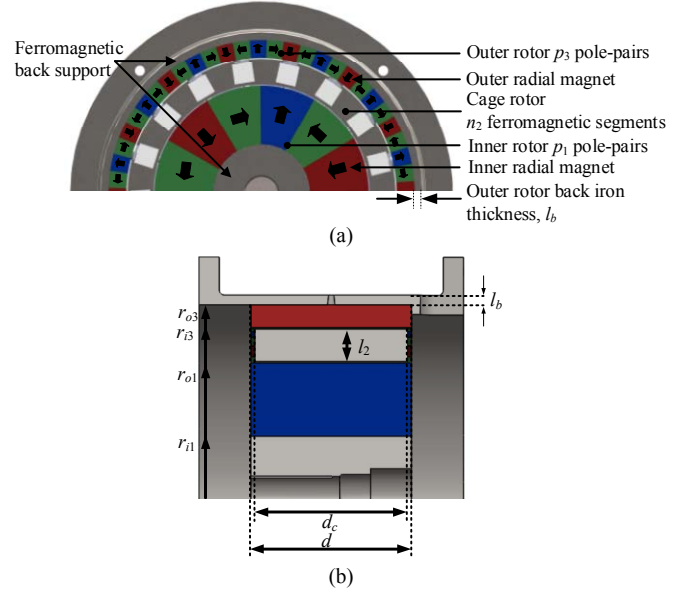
(a) Half cut-away view of the Halbach rotor magnetic gearbox and (b) axial view of the magnetic gearbox .
